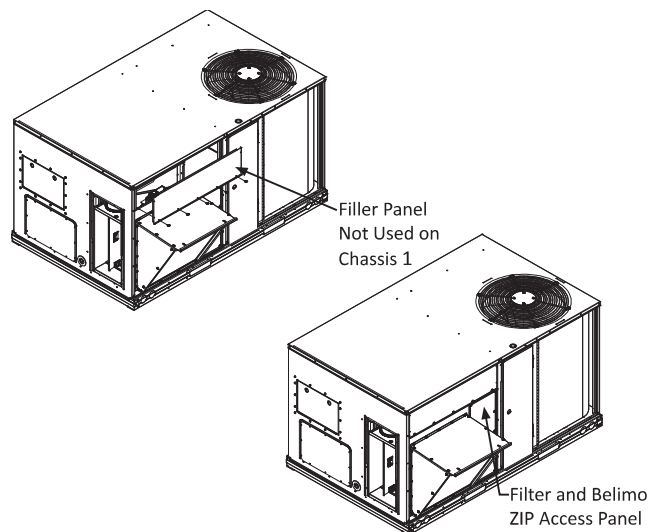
Installation of OA Hood, Filler Panel, and Filter Access
